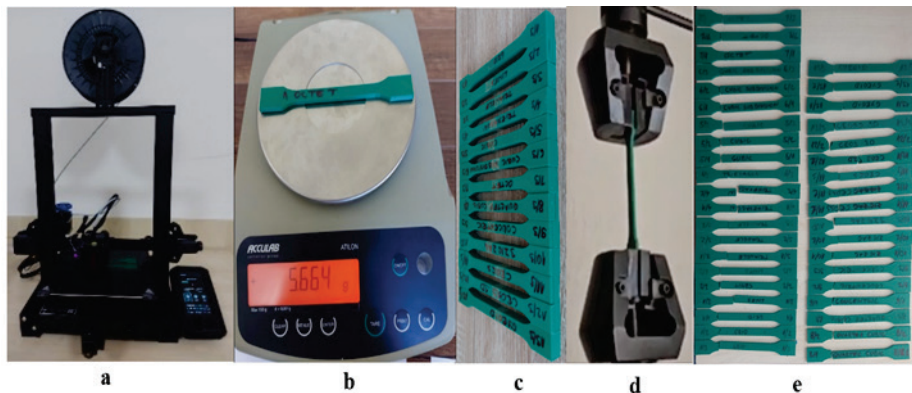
a) Printing samples; b) Weighing the samples; c) Printed samples; d) Specimens during tensile testing; e) Tested samples (broken)
